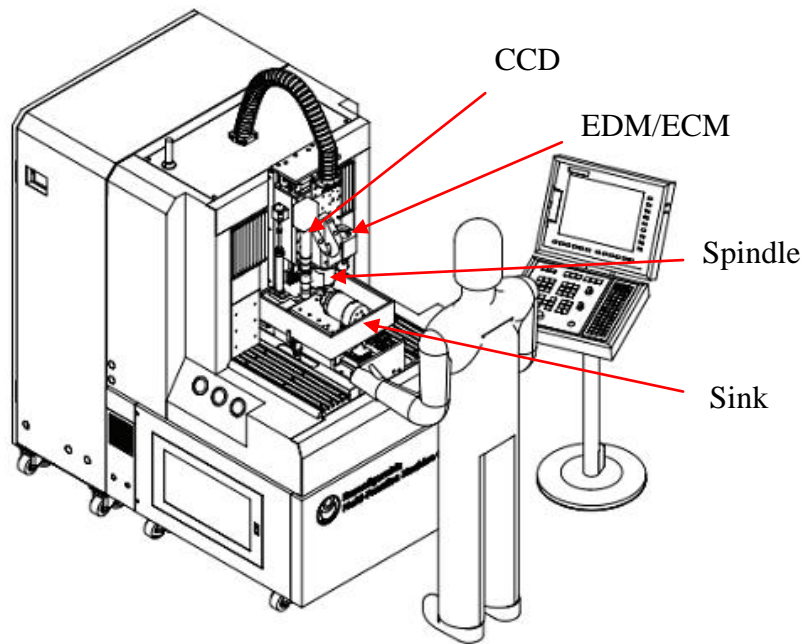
The reconfigurable machining centre with multiple machining modules [70]
